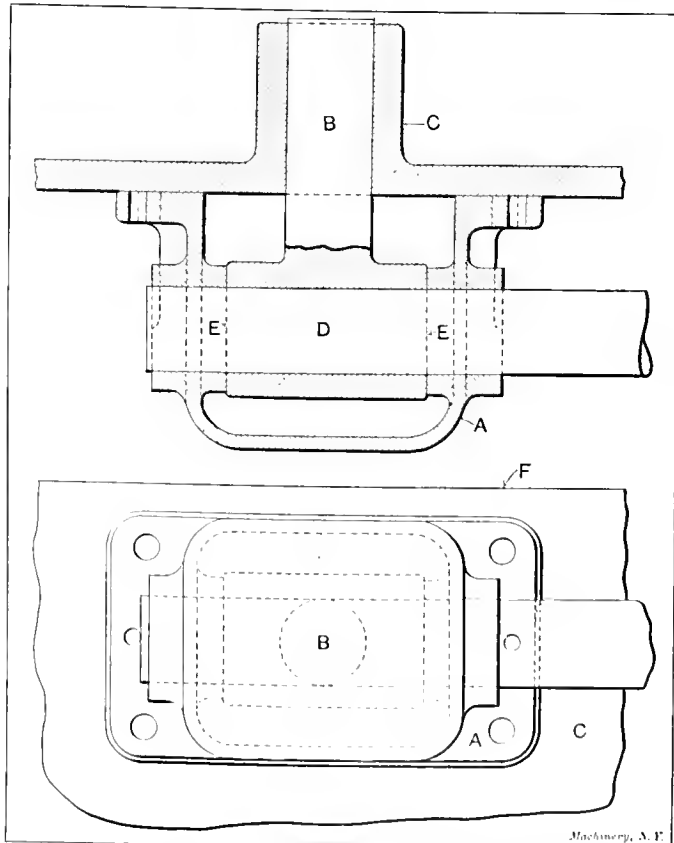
T-jig for Locating a Bevel Gear Bracket
